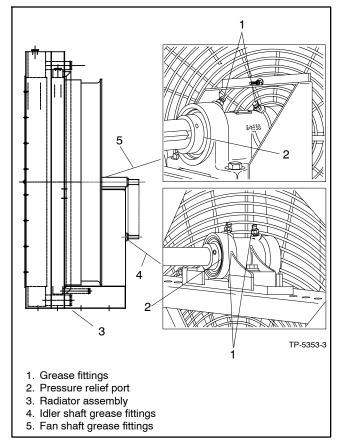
Radiator Fan Bearings and Pressure Relief Ports, Typical
